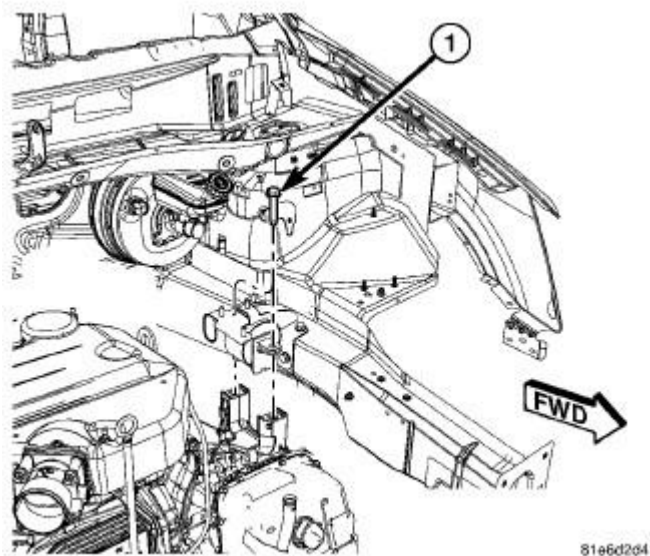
Engine Mount-To-Transmission Bracket Bolts
